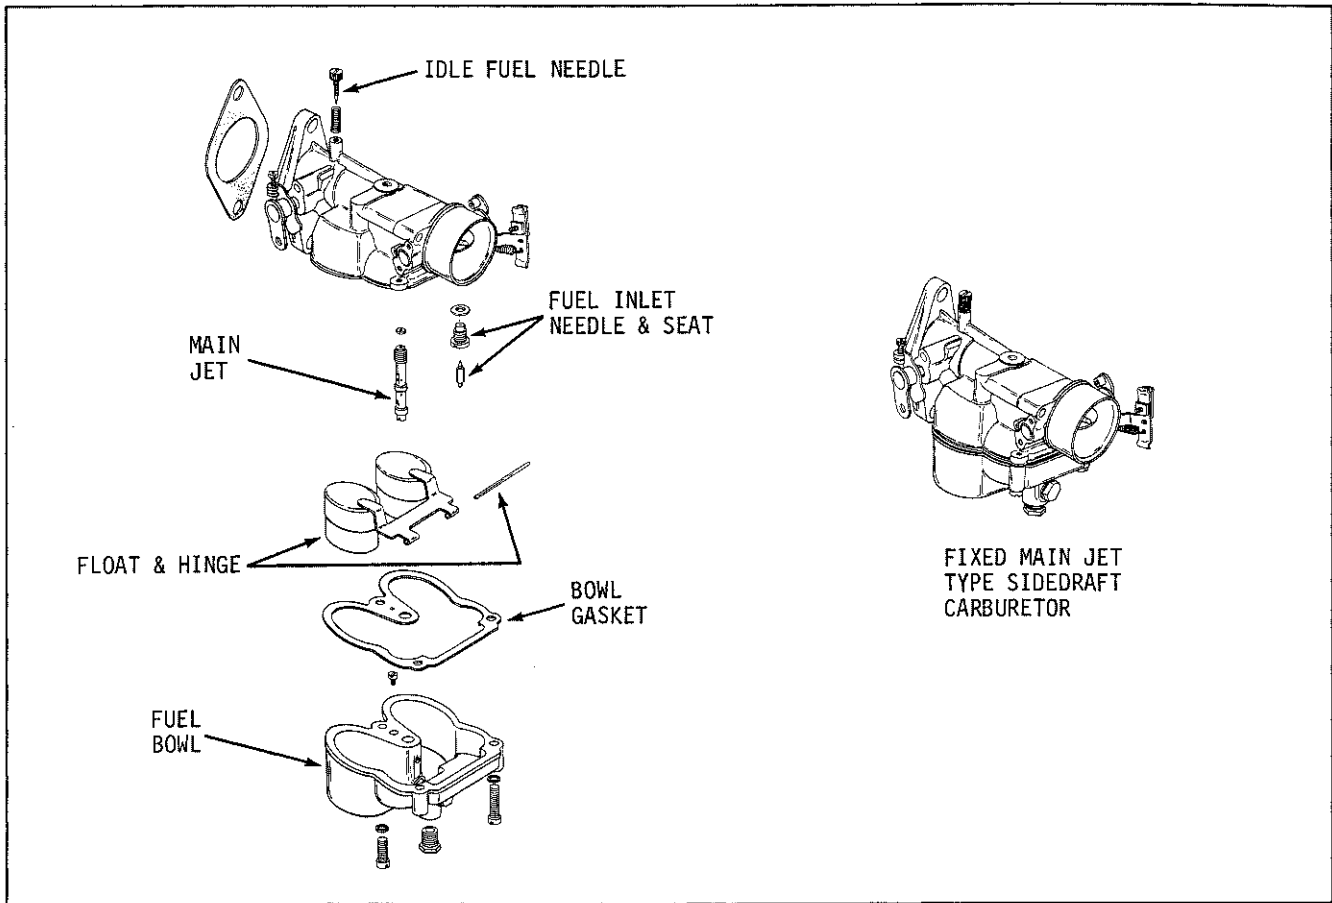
DISASSEMBLED VIEW -- TYPICAL FIXED MAIN JET CARBURETOR
